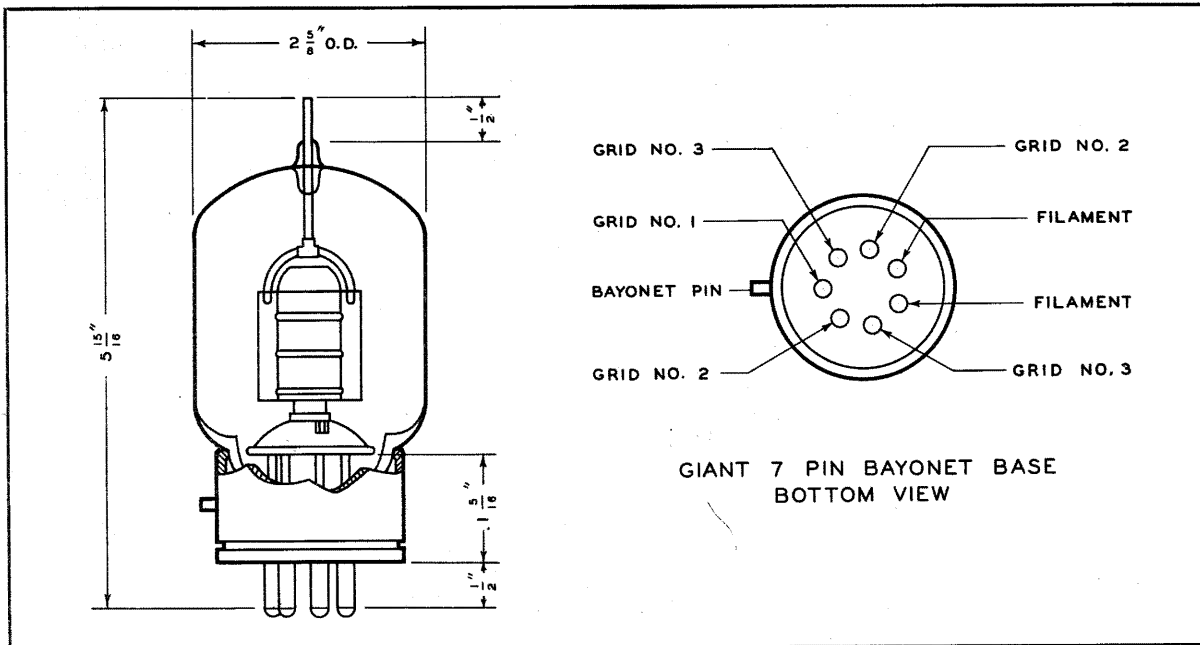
Tube JAN-4E27—Outline Dimensions and Bottom View of Socket
